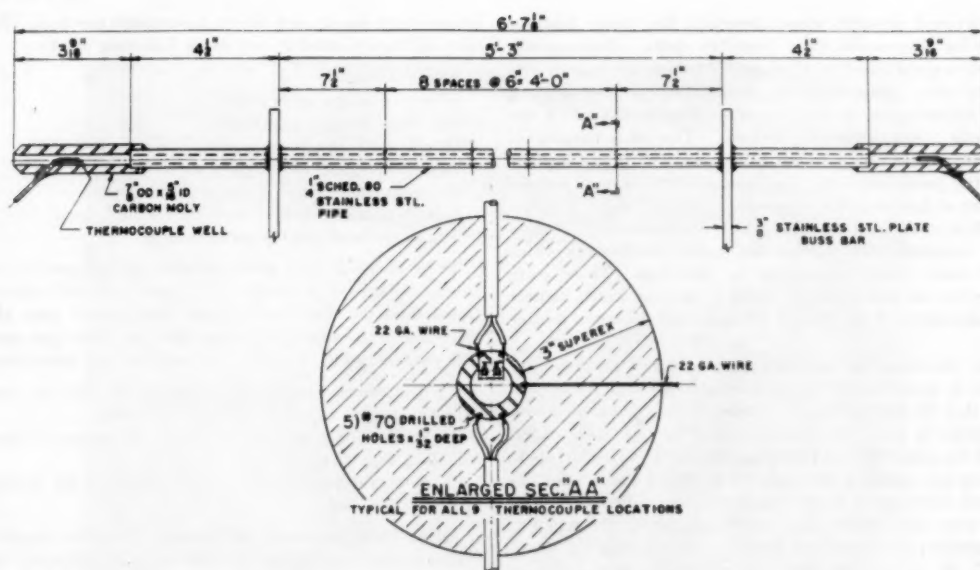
DETAIL OF HEAT-TRANSFER TEST SECTION
